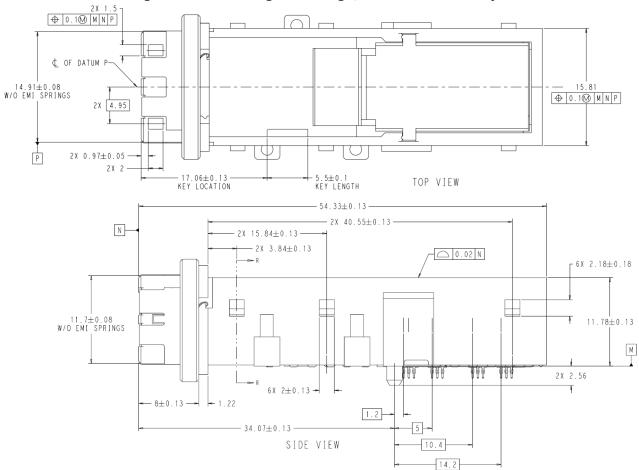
X4 Through Hole Cage/Connector Assembly
